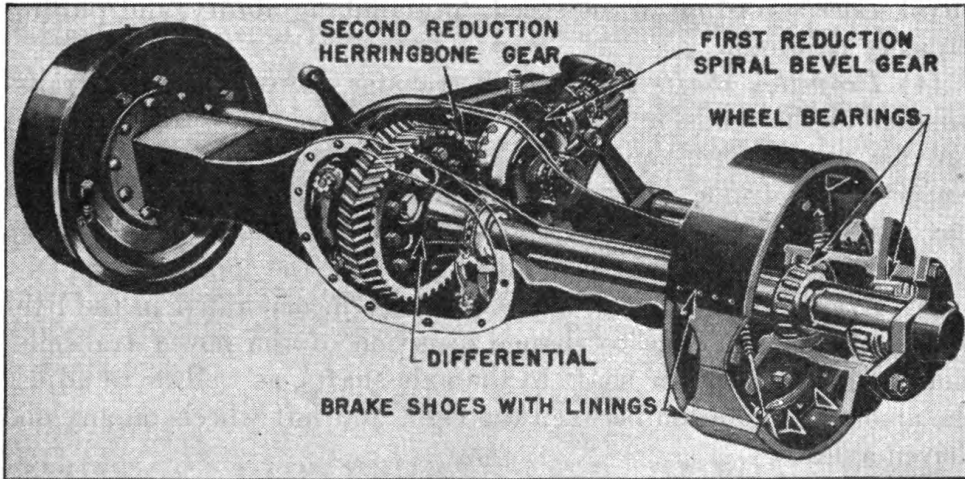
Live (driving) rear axle unit with double reduction bevel and herringbone (combination) gears.
